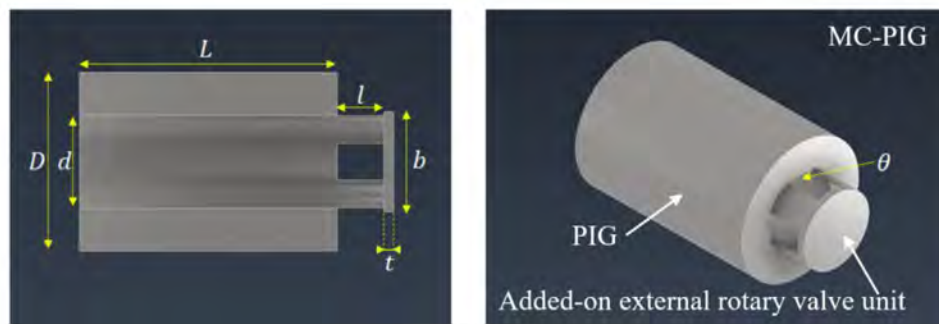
Geometry of the MC-PIG model. The MC-PIG consists of the PIG body and the external rotary valve unit add-on. The valve unit can be controlled by adjusting its opening valve angle for speed control.
